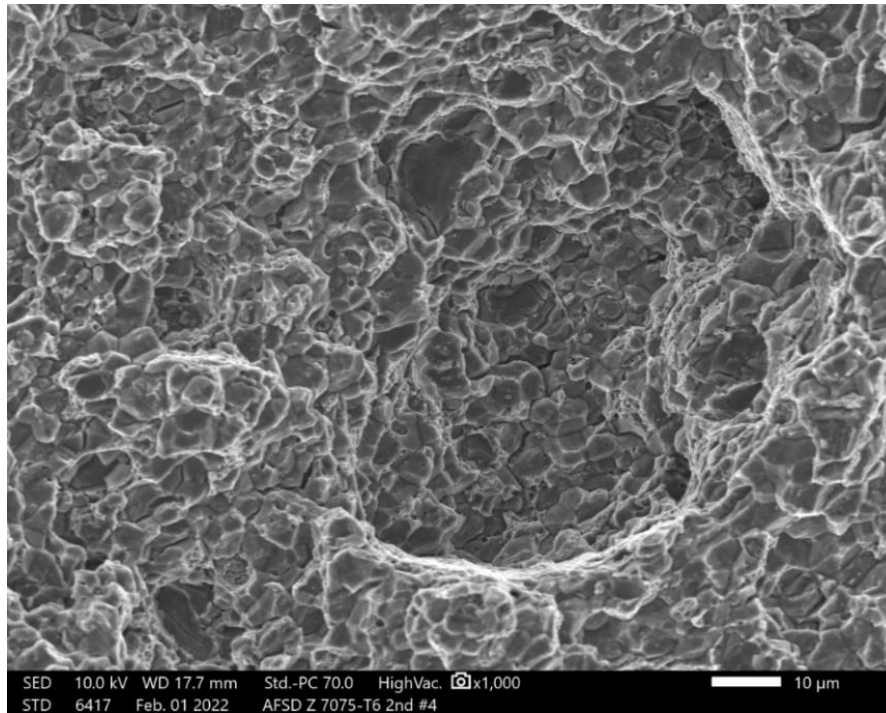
The fracture surface at 1000X was smooth and slightly faceted in appearance, which indicates brittle failure.
